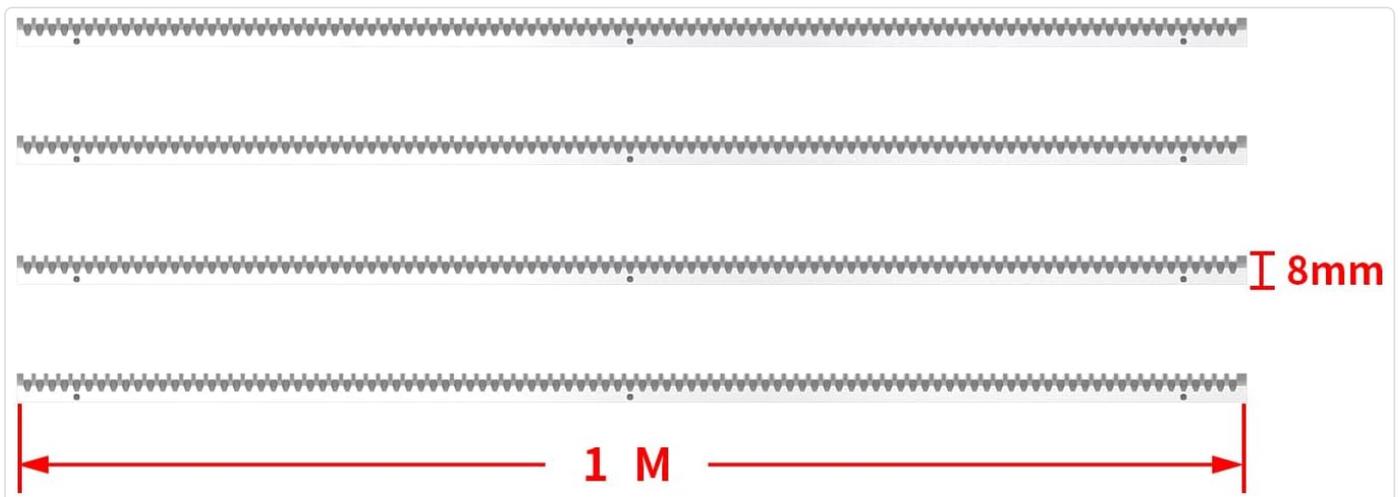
A diagram illustrating the dimensions of the steel gear racks, showing a length of 1 meter and a thickness of 8mm.
